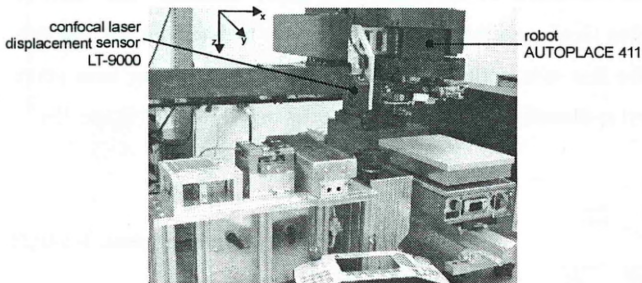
Assembly system with mounted laser displacement sensor (LT-9000)
